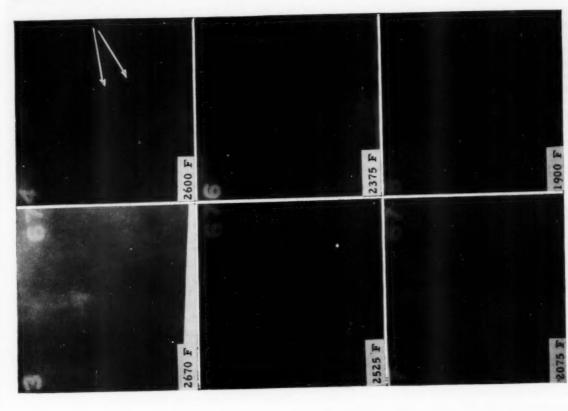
Series of radiographs obtained during solidification and cooling of 0.33-pct C steel test casting.
